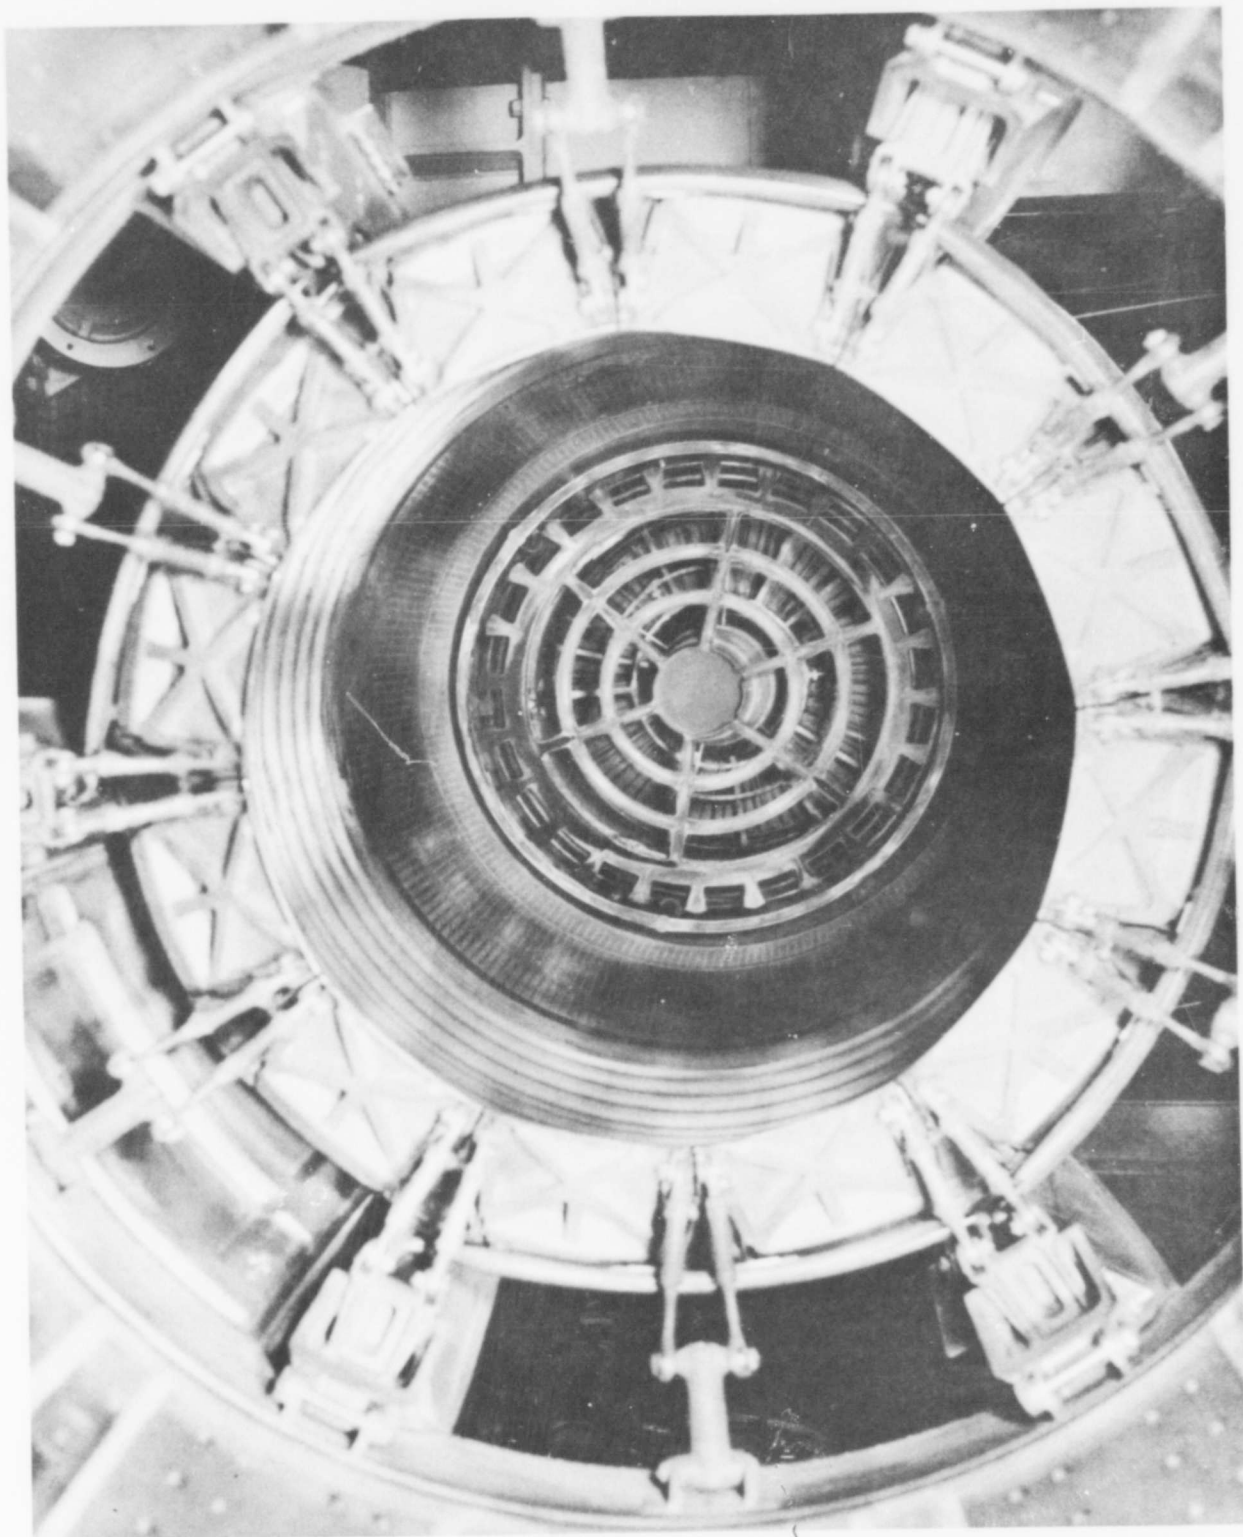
TF-30-P1 AUGMENTOR (REAR VIEW)
